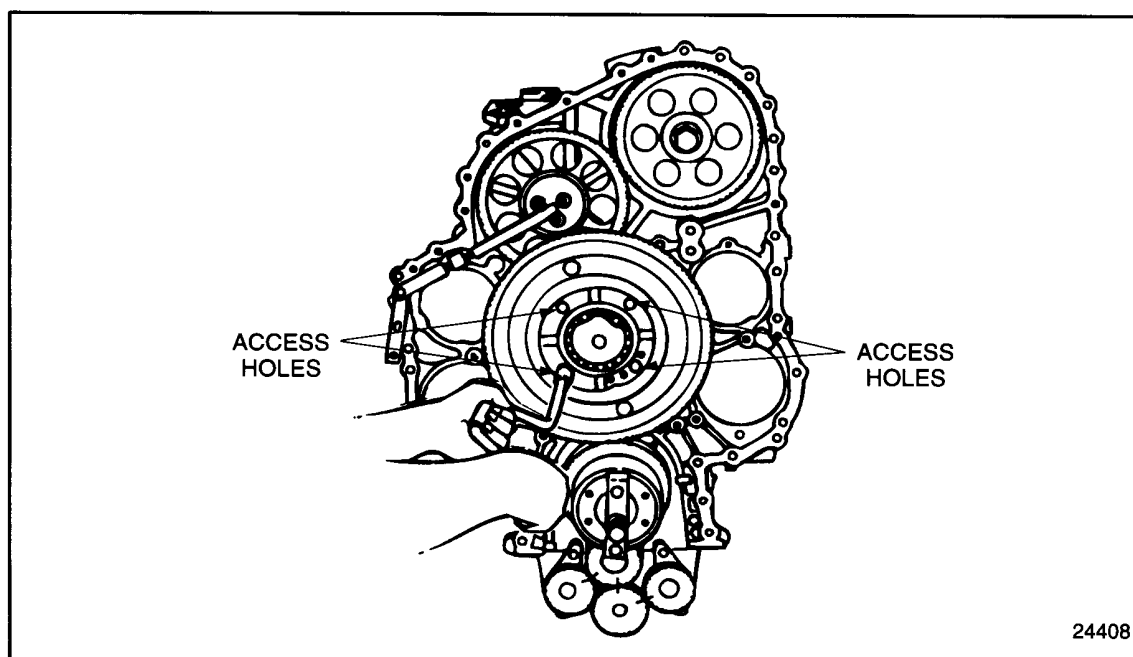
Removing Bull Gear and Camshaft Idler Gear and Hub
